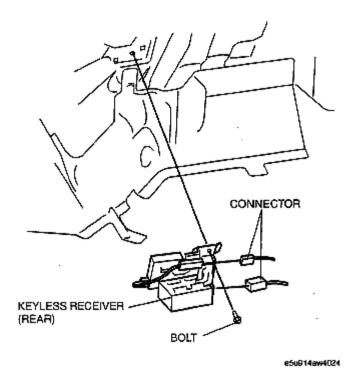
Identifying Keyless Receiver Remove/Install Components (Rear) Courtesy of MAZDA MOTORS CORP.
